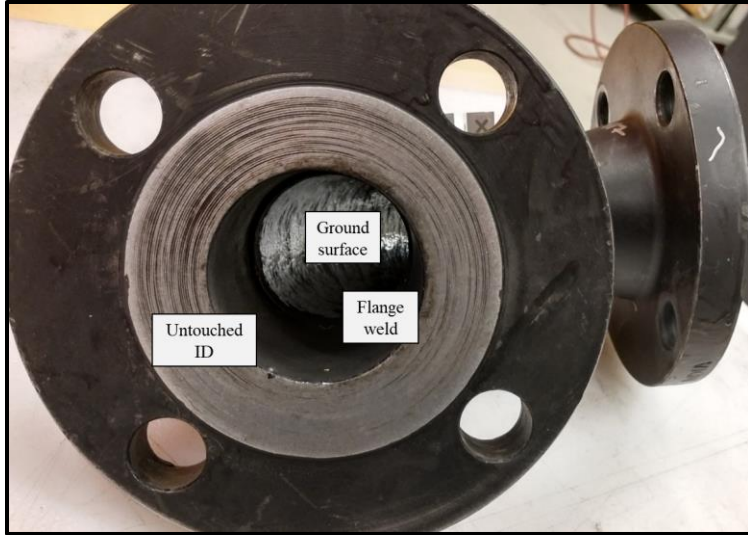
View of inner diameter of pipe elbow with material ground away
